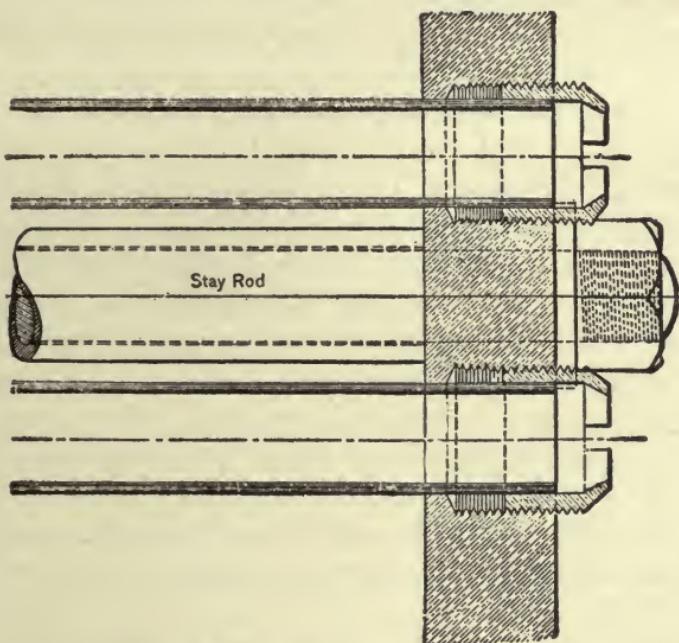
FERRULES AND TUBE PACKING IN SURFACE CONDENSER
